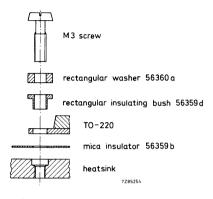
Insulated screw mounting with rectangular washer into tapped heatsink. Known as a "top mounting".
